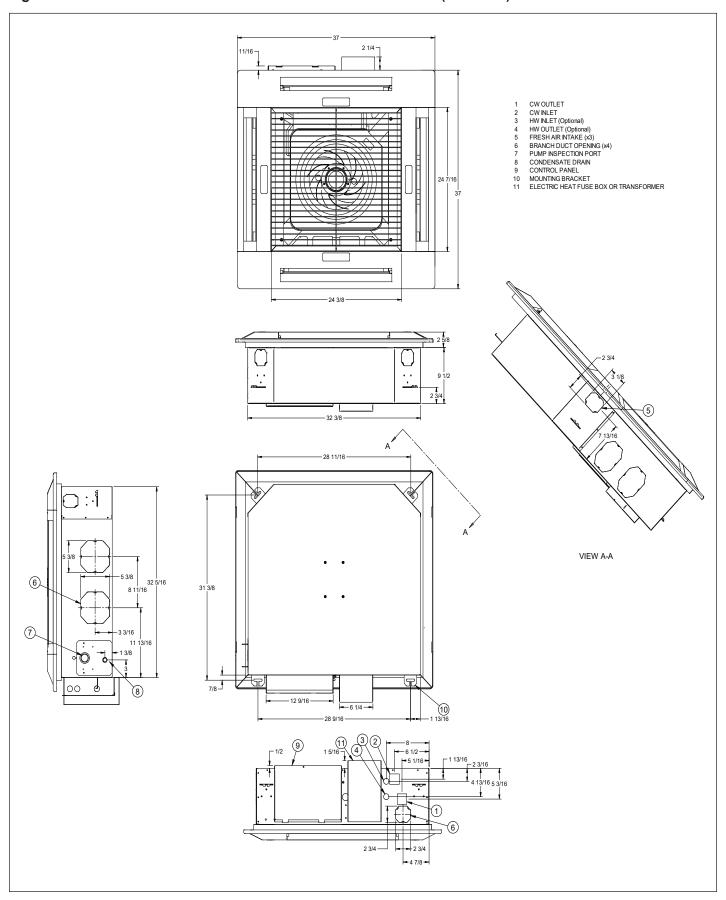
Dimensions - Large Chassis: CCW33 and CCW36 (in inches)
